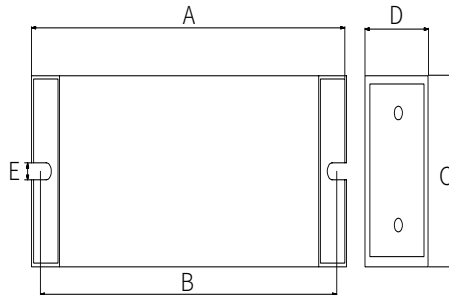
Outline drawing and mounting hole dimensions of pre-charge resistor
